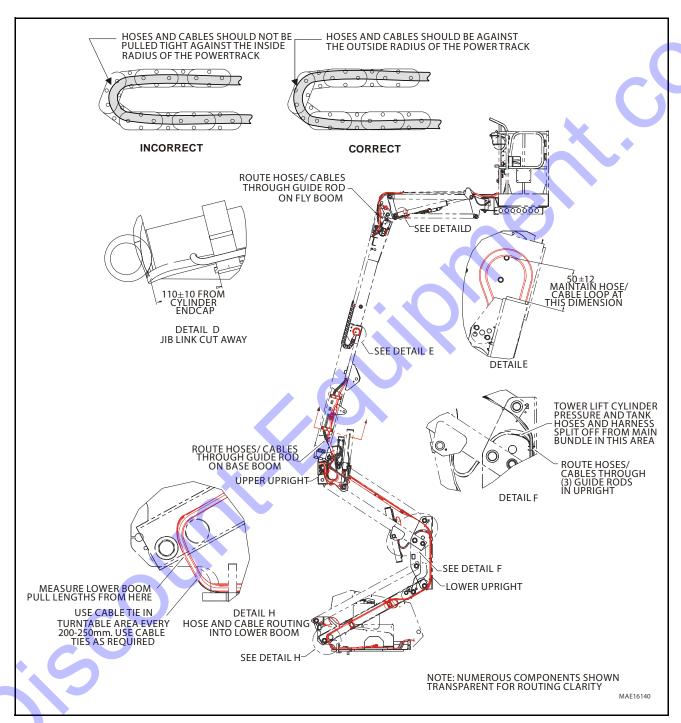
Cable Installation and Identification - Sheet 3 of 8
